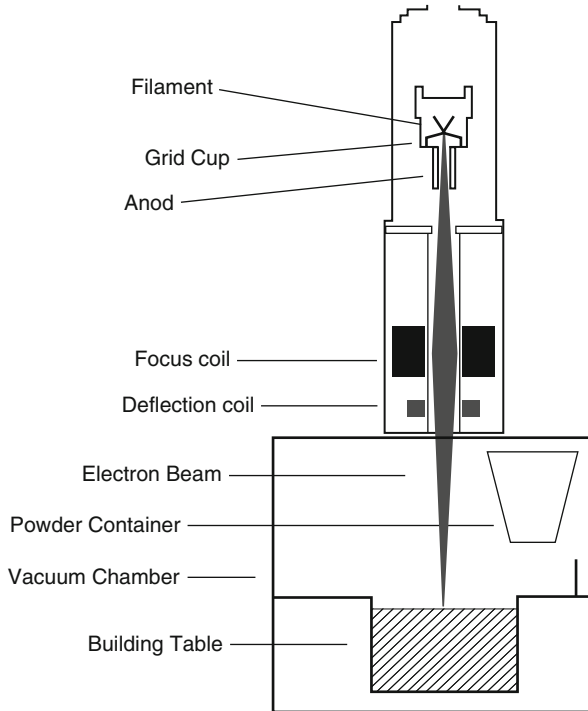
Electron beam melting. Schematic layout of the Arcam A2 machine. By courtesy of Arcam
